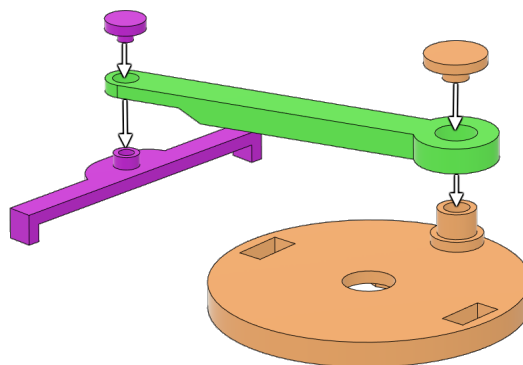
Exploded view of the Ball Pusher's slider-crank linkage. Two retaining pins prevent the connecting rod from coming loose.
